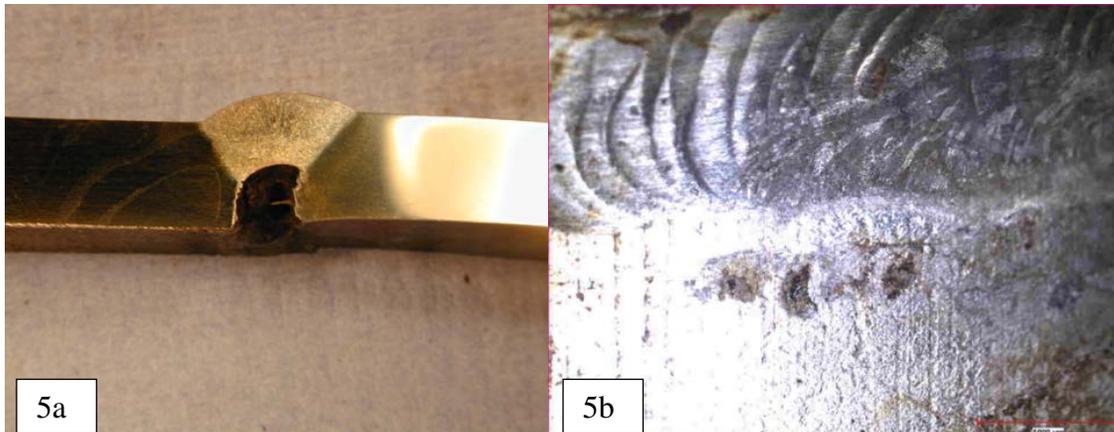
a) Weld Root Run Corrosion and b) LTHAZ Corrosion Attack
